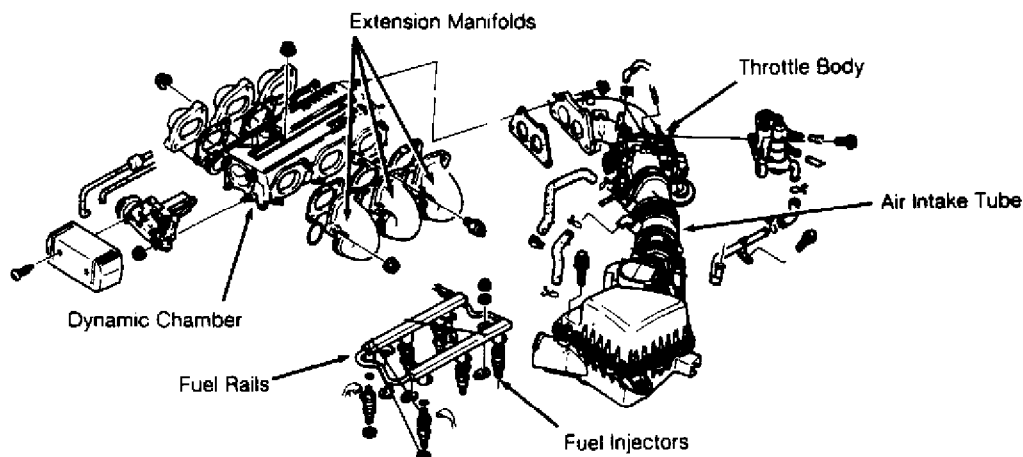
View Of Upper Intake Manifold Components & Fuel Rail (MPV 3.0L)
